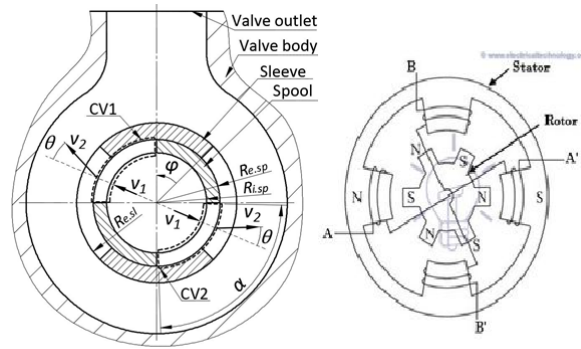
Construction of the two parts of the valve which are the rotary orifice and the stepper motor
